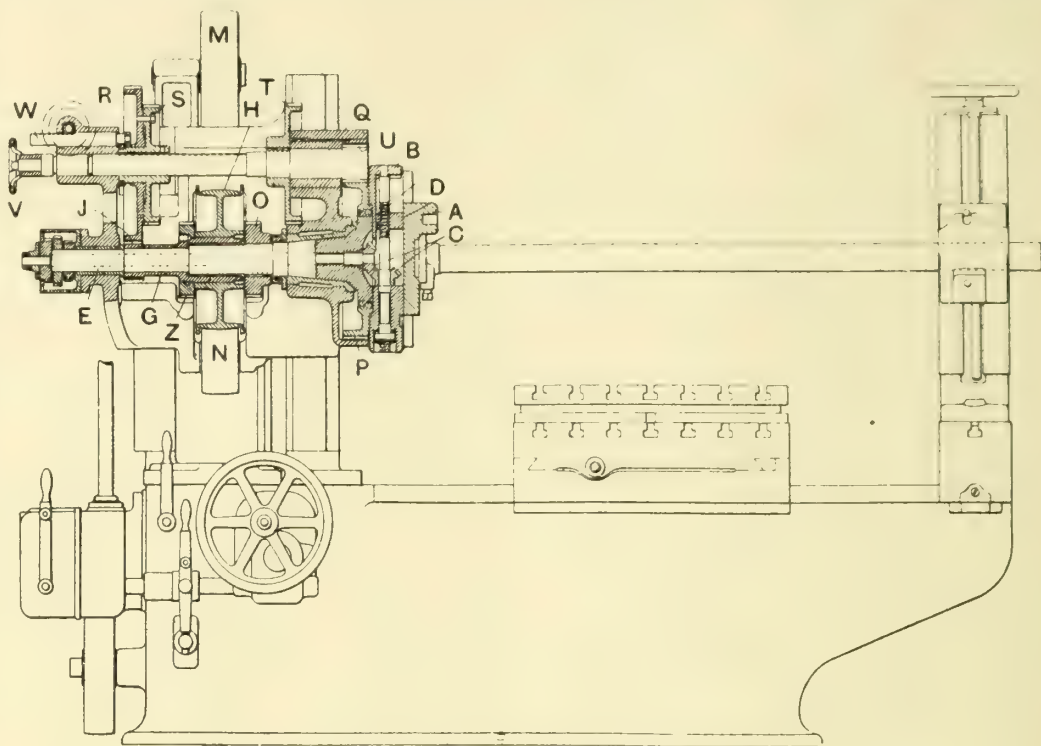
ALL GEAR DRIVE FOR BORING AND FACING MACHINES.
